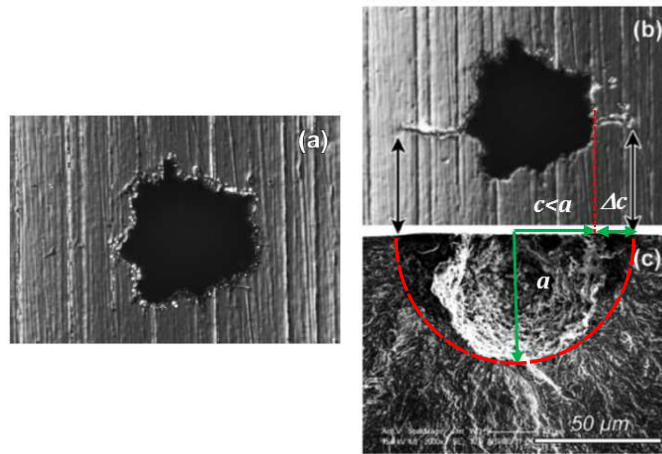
a) Pit with no cracks; b) Non-propagating small cracks at the pit mouth c) Fracture surface after further loading at a higher stress range indicating shape of crack before failure. Figure adapted from [146]
